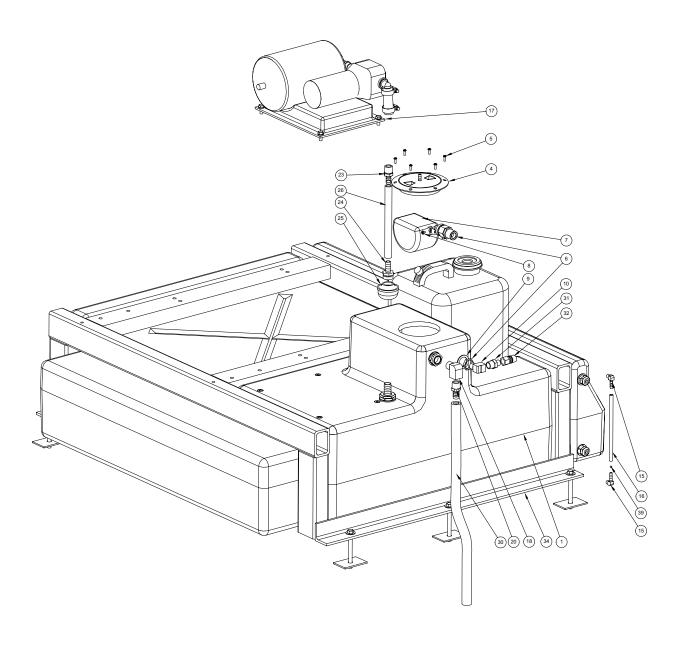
85 Gallon Rotomoded Fresh Water Tank Assembly - Rear D-5566 Rev B
